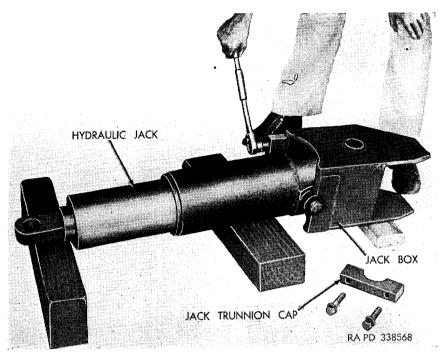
Assembling jack box to jack—bulldozer M1A1.
